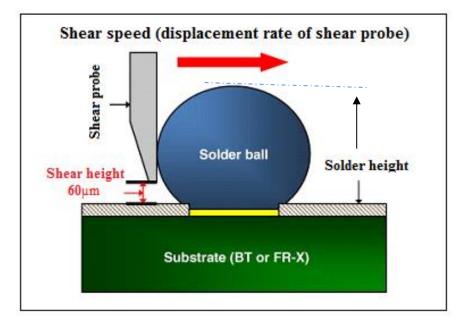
The schematic showing shear height and test direction of BGA solder ball
